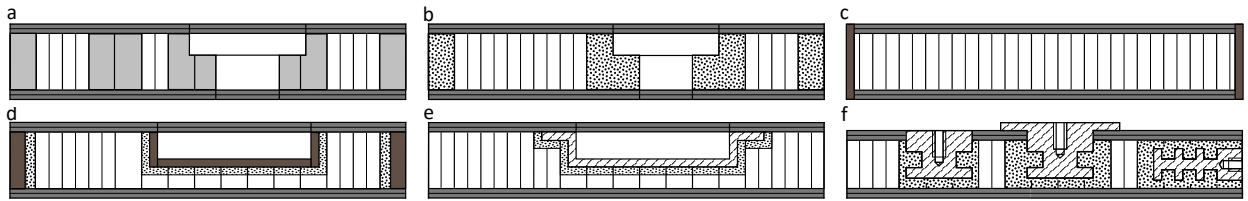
(a) potting, (b) edge filler, (c) edge band, (d) FRP-closeout, (e) sheet metal, (f) inserts
